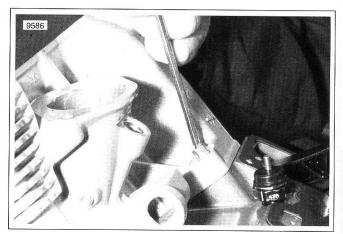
5 mm Head Fasteners @ 9.7 Nm (85 in-lbs)
